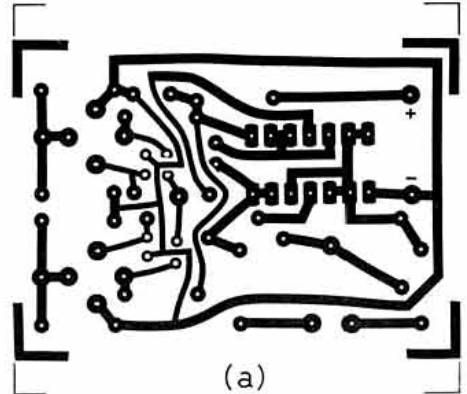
(a) Solder side of the PCB looking from the top. This is produced on double-sided board leaving the component side as a ground plane. Solder all ground pins on both sides of the board. The coaxial feeder cable is connected to component side (b).
